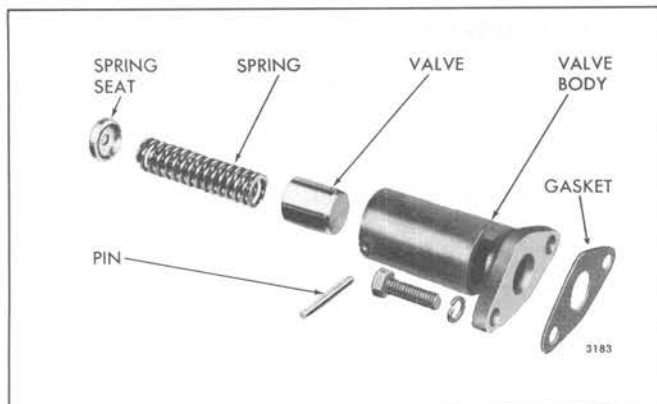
Oil Pressure Regulator Valve and Relief Valve Details and Relative Location of Parts (12V and 16V Engines)
